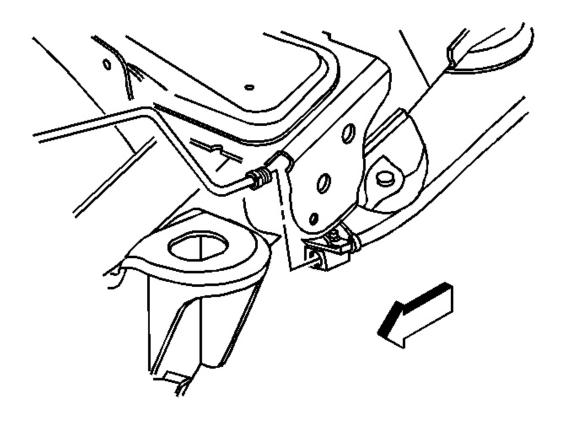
Rear Brake Hose From Brake Pipe Courtesy of GENERAL MOTORS CORP.
